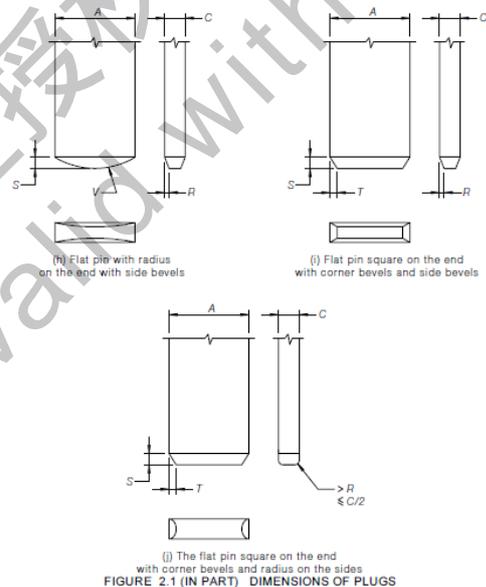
(IN PART) DIMENSIONS OF PLUGS
